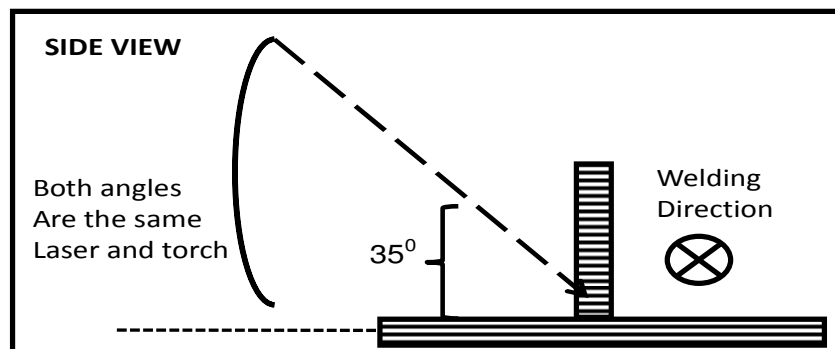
Schematic of position of MIG and laser in horizontal hybrid welding.
